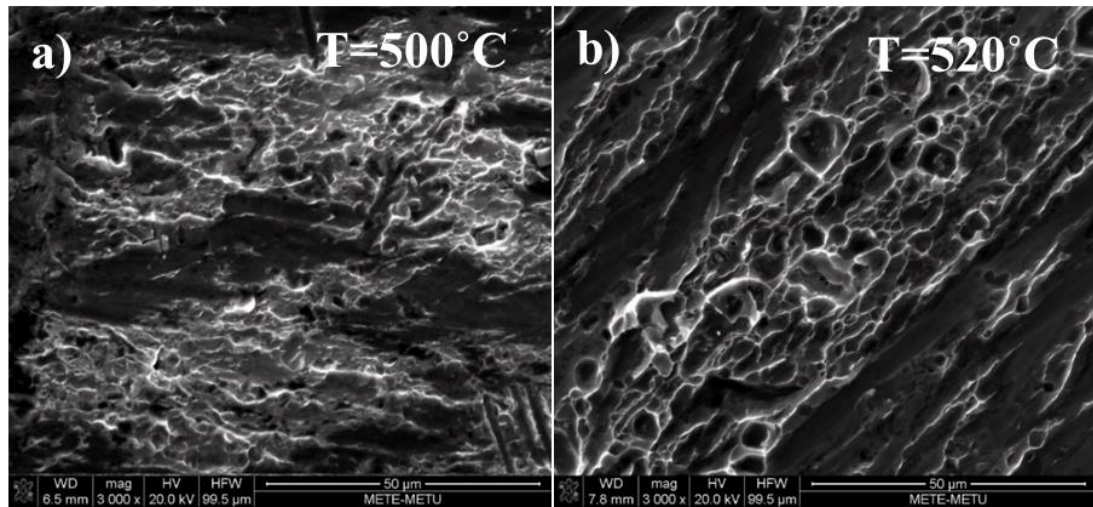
5. Fracture surfaces of the specimens, diffusion bonded at a) 500°C, b) 520°C under 13 MPa pressure, for 3 h. cooled in furnace.
